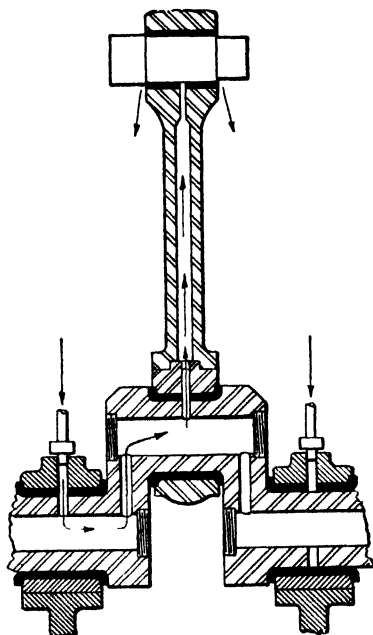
Path of Lubricating Oil Through Crankshaft and Connecting Rod to Wrist Pin
